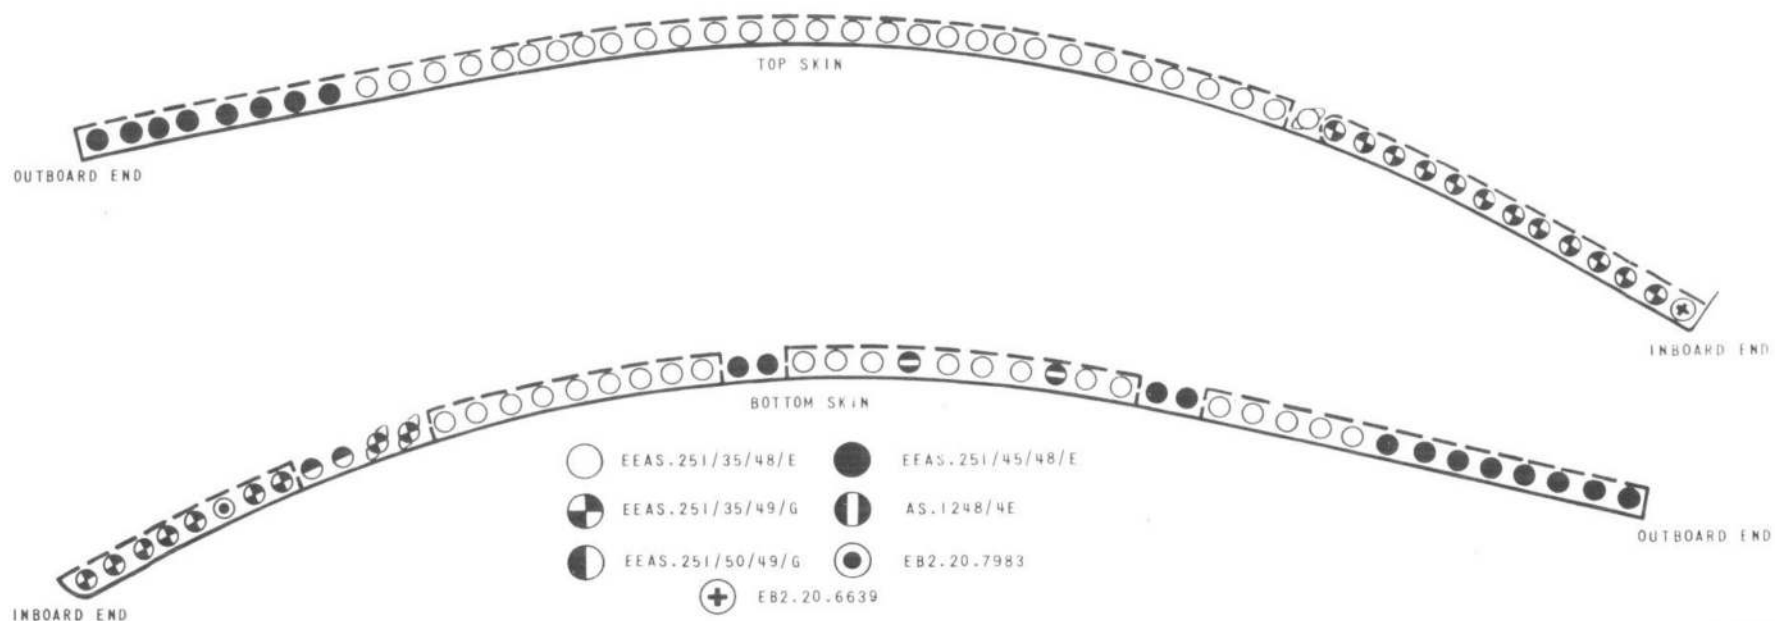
Leading-edge tanks - key to attachment bolt positions
